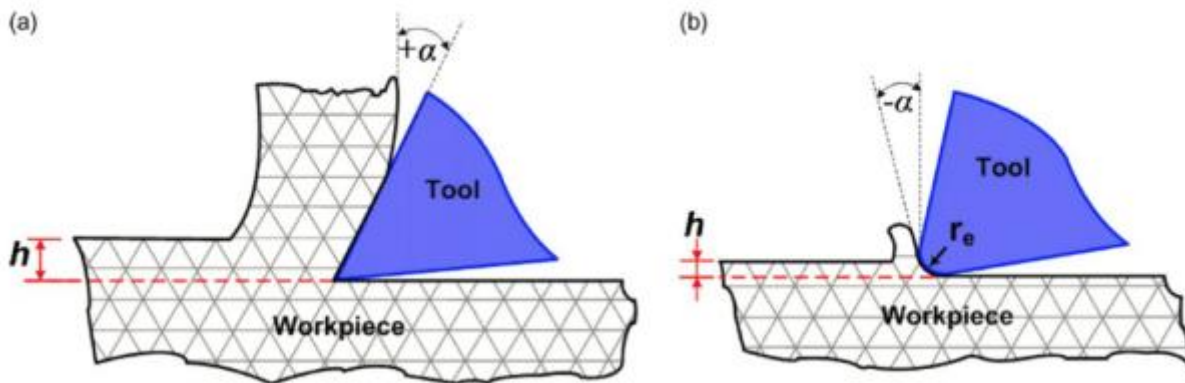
(a) Macro-milling; (b) Micromilling [1]
